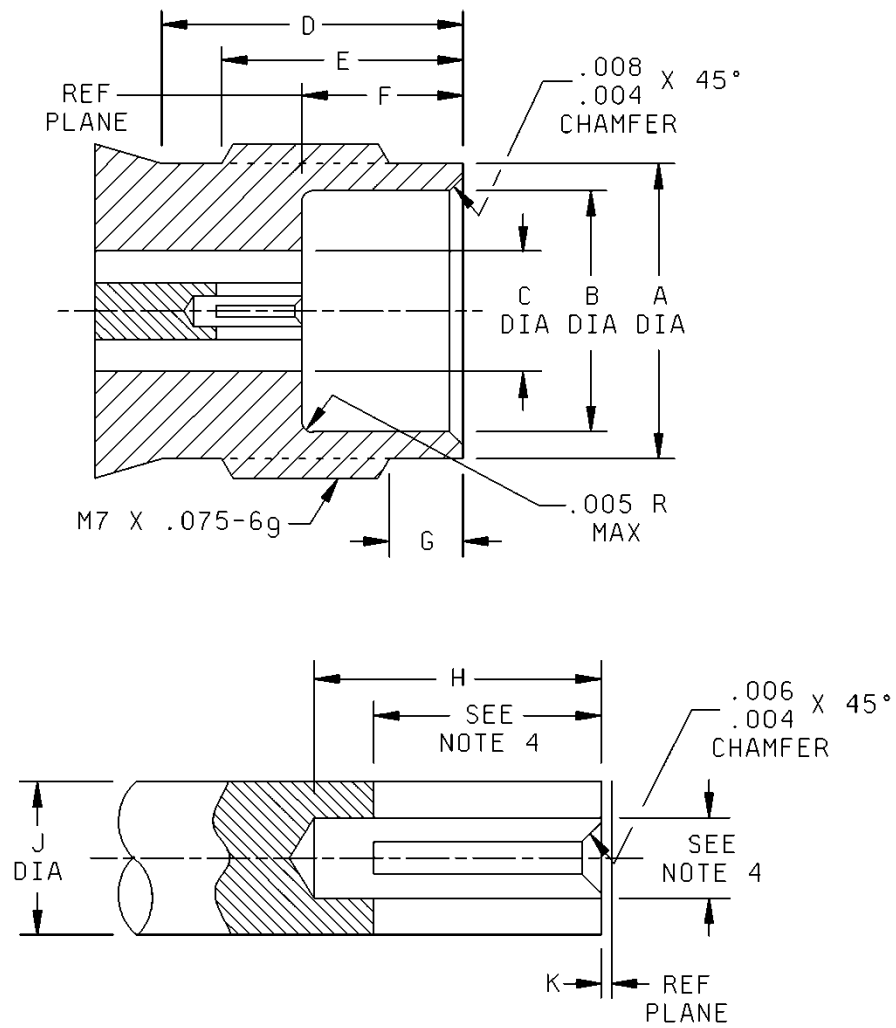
Interface dimensions (2.4 mm) socket contact.
